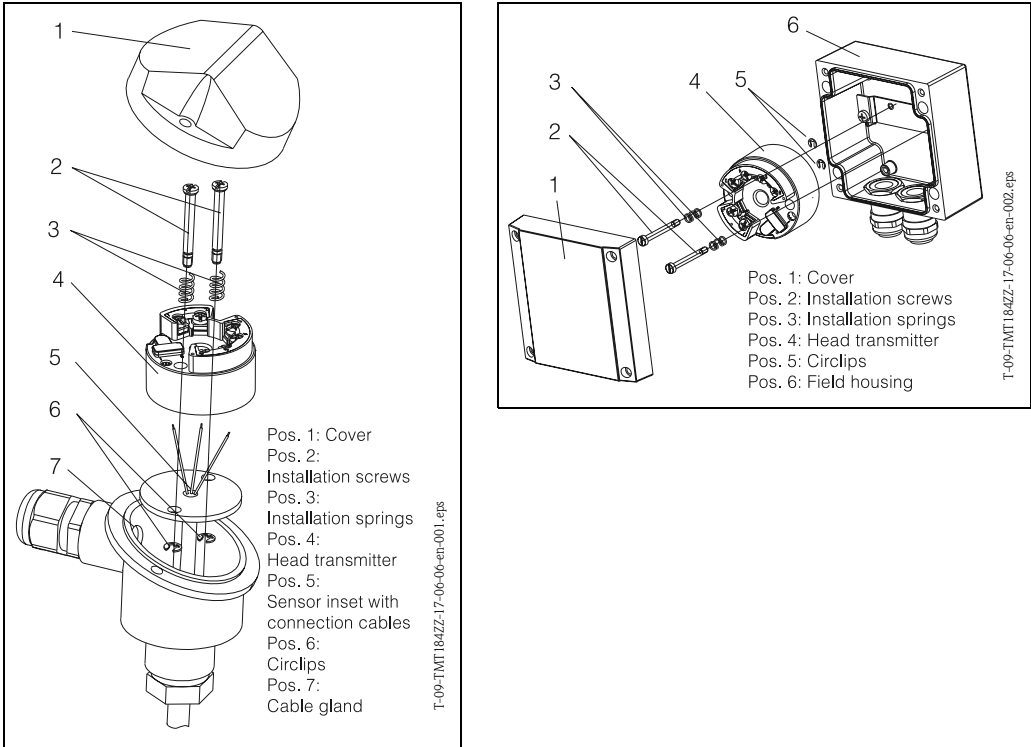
Installation of head transmitter into a Form B sensor connection head (left side) and a field housing (right side)
